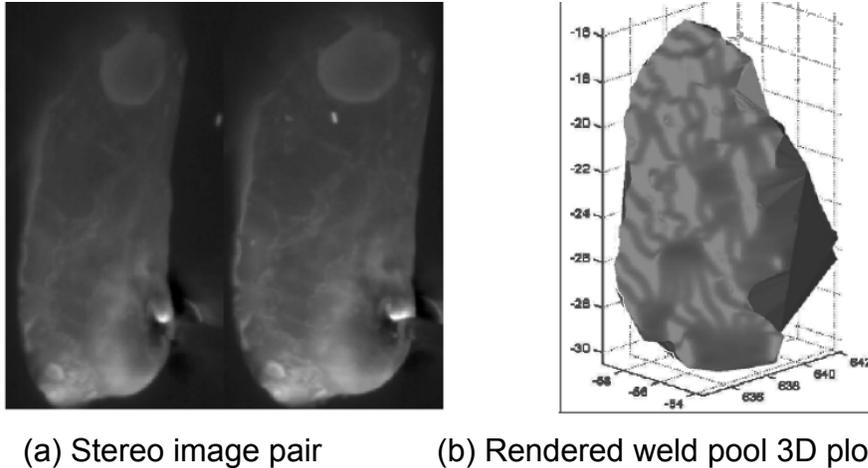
, Stereovision method to measure 3D weld pool surface [32]
